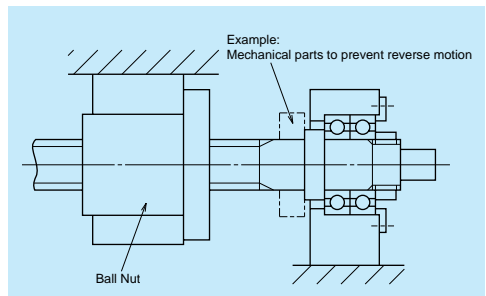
•3 Nut and ball screw are required to be separated when installing in this structure.
